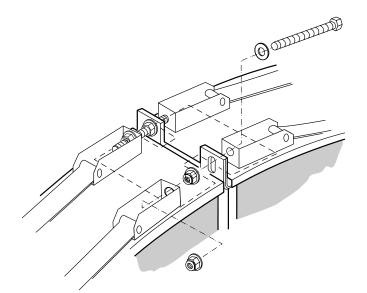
1. Fit the clamping straps, using the M10 ∞ 80 mm long bolt, two washers and locknut supplied. The auxiliary nuts may be left in position after assembly. Use the same procedure to assemble the other rotor sectors in sequence.
